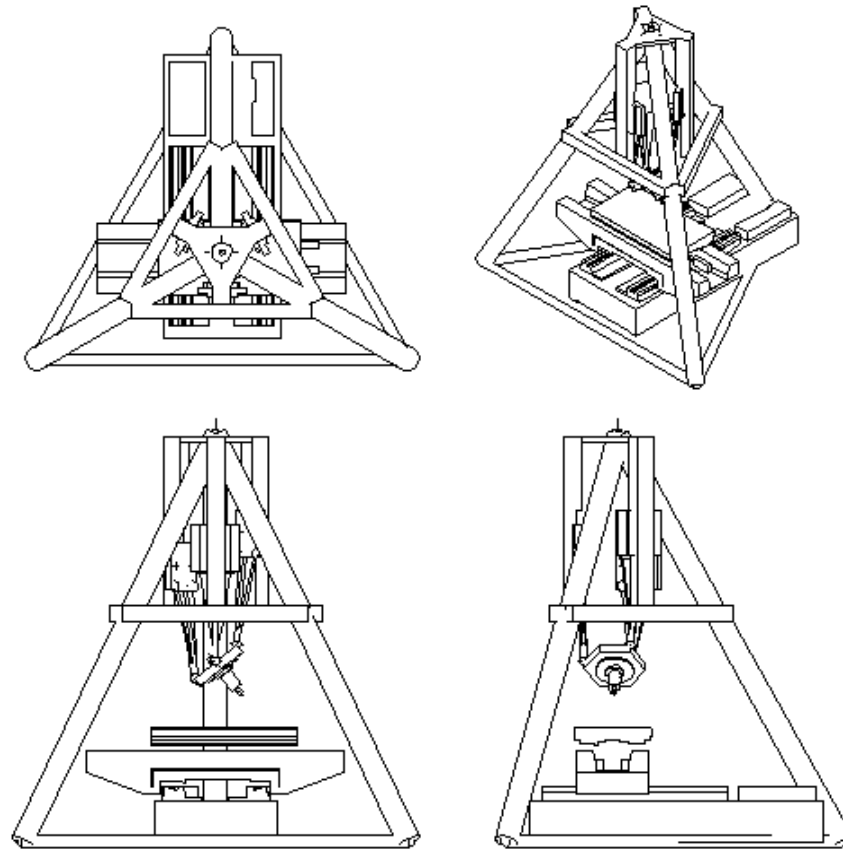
TRR-XY Hybrid Parallel Link Machine
